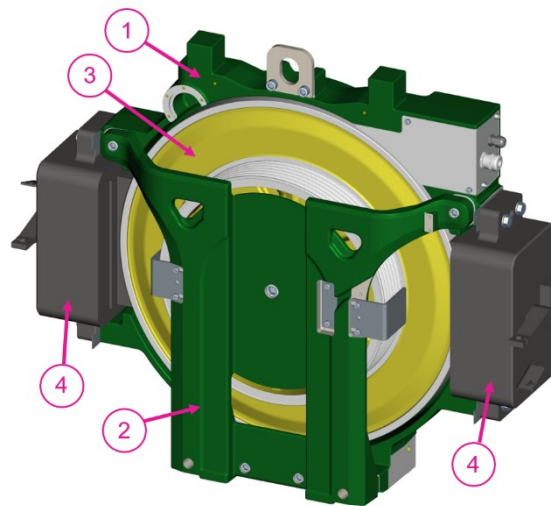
NMX hoisting machine and its main components. 1: rear body, 2: front body, 3: rotor and traction sheave, 4: brakes.
